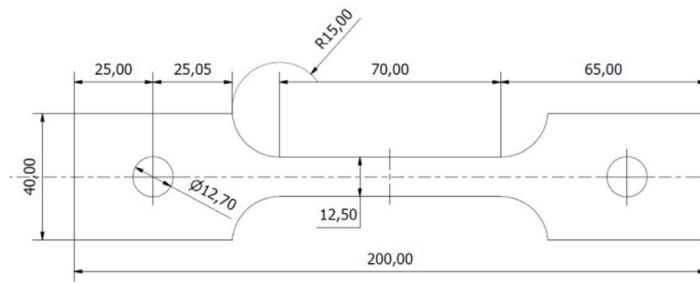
Dimensions of tensile test specimen with 2 mm thickness.
